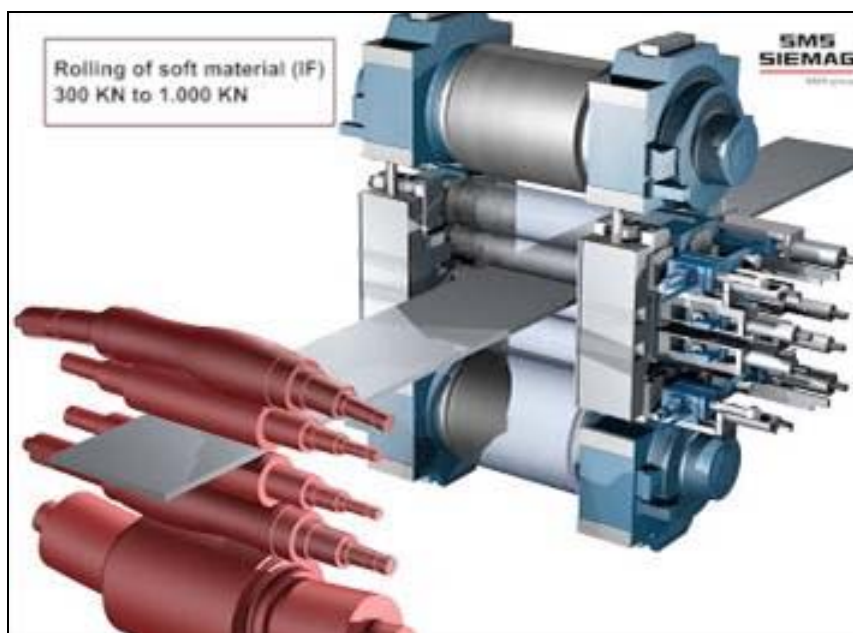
MB 22-B52" mill for Hunan Xiangtuo Goldsky Titanium Metal Company, carried out in all-in-one modular design, manufactured, pre-assembled in the Hilchenbach workshops of SMS Siemag.
